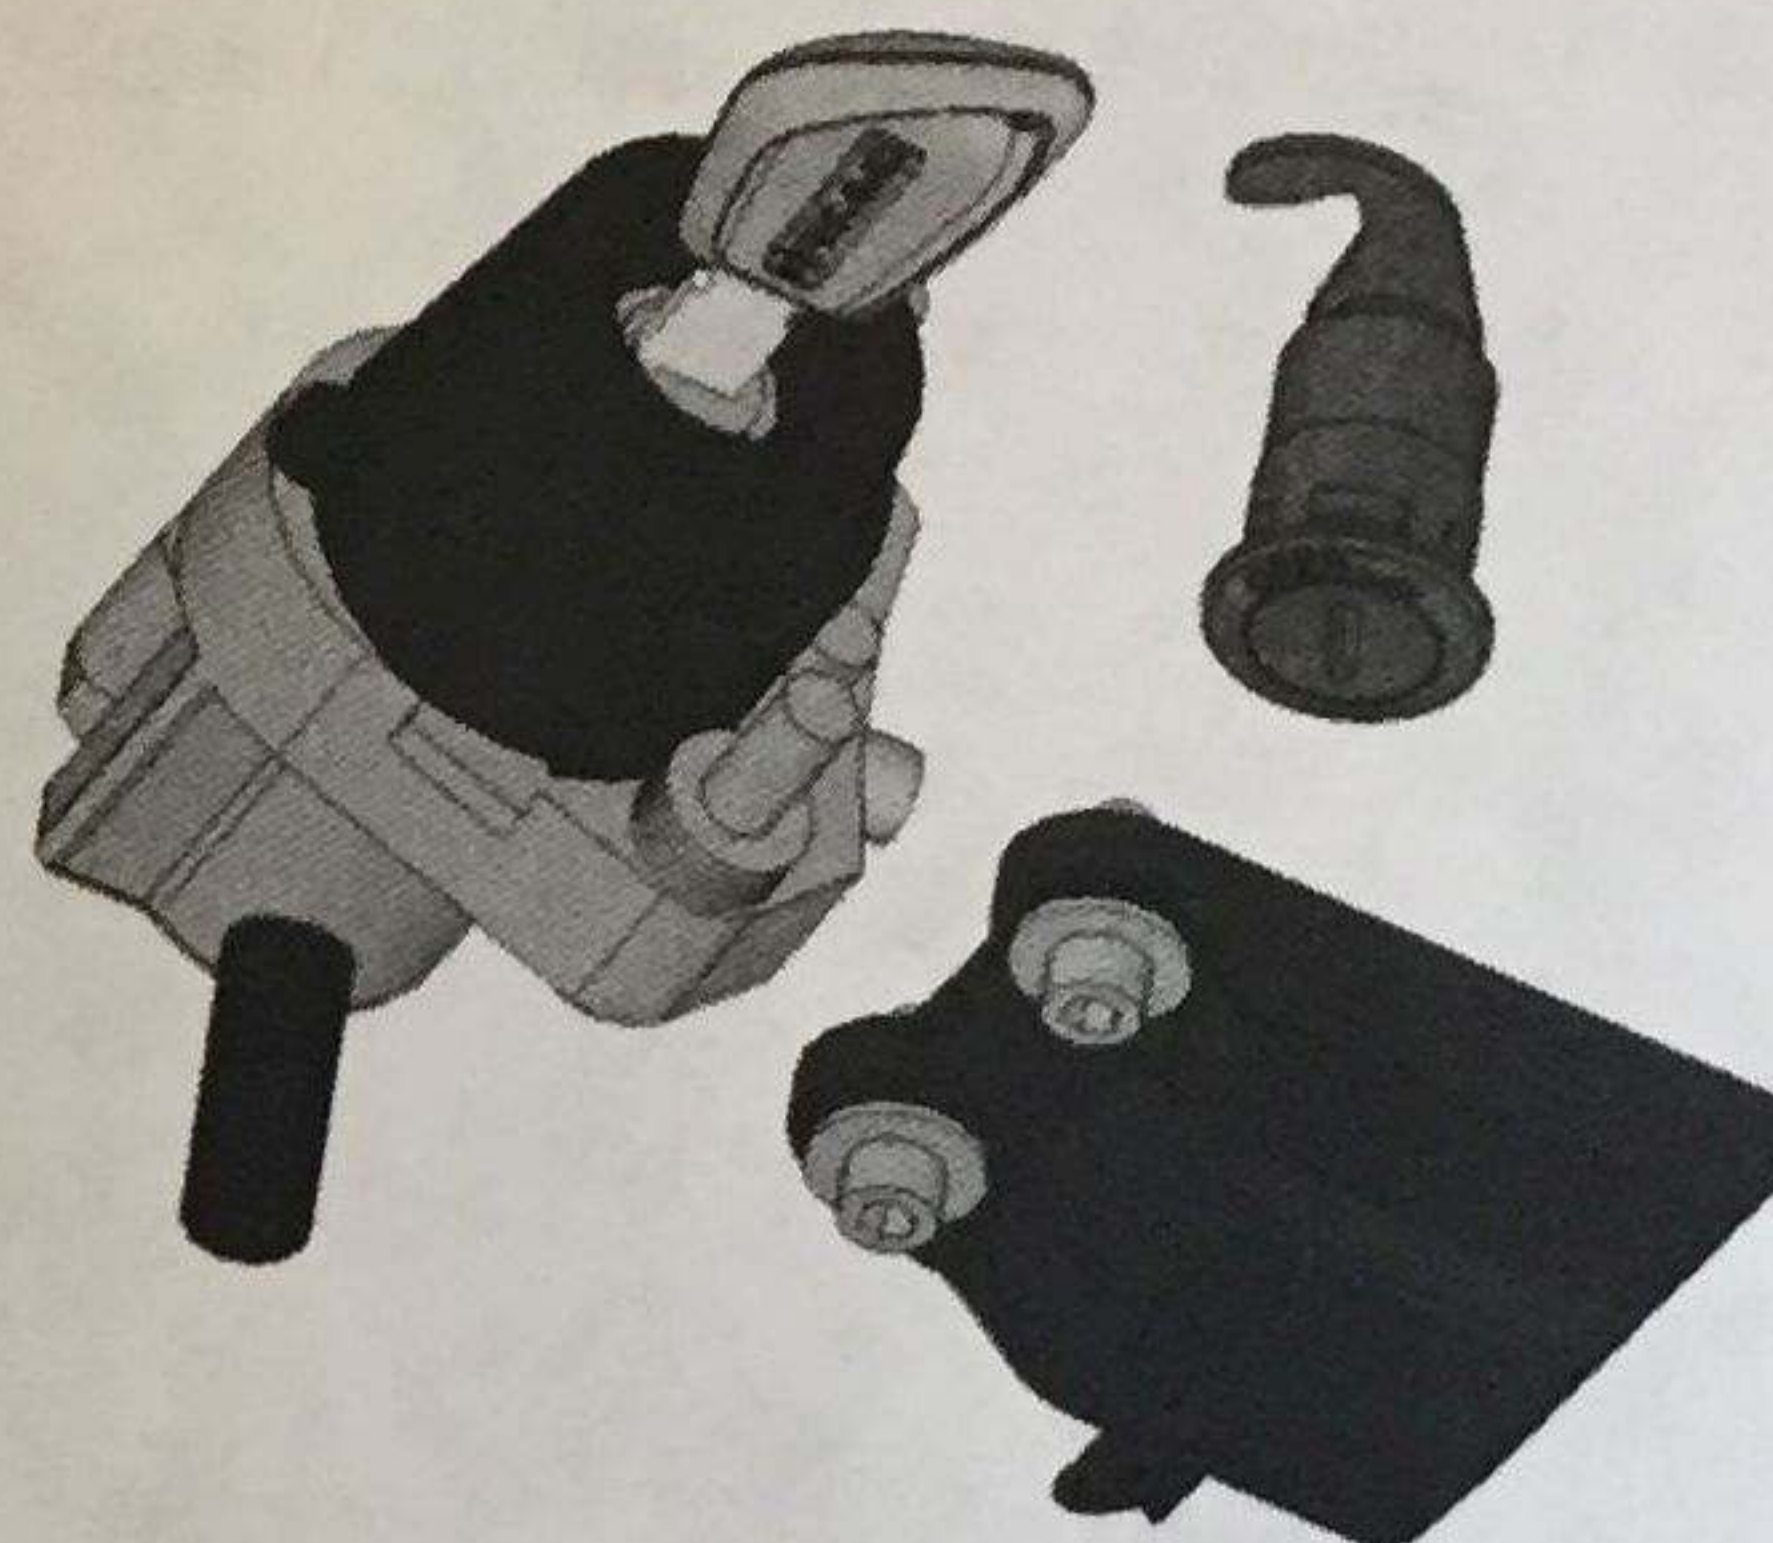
Key, Ignition, Immobilizer, and Seat Lock
